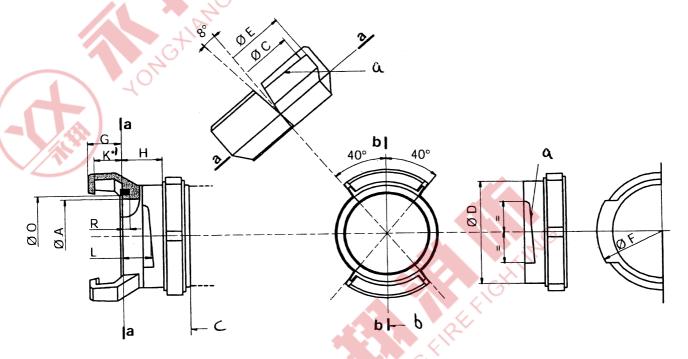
Coupling with hose tail — Part SGD and plug — Part SGB
